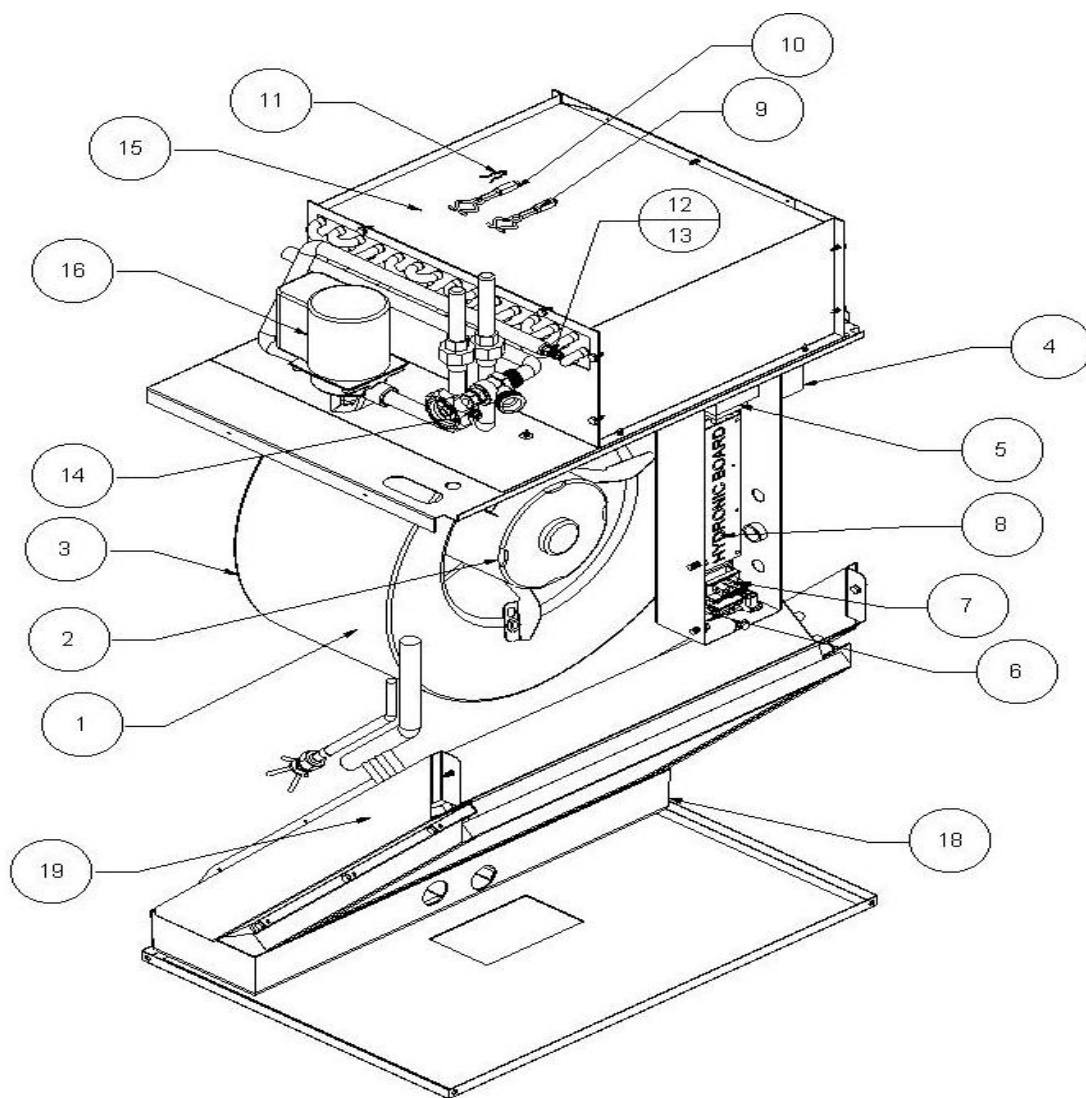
H02-46 / 18-24WCW-HW Hydronic Heat Air Handler Repair Parts Schematic
